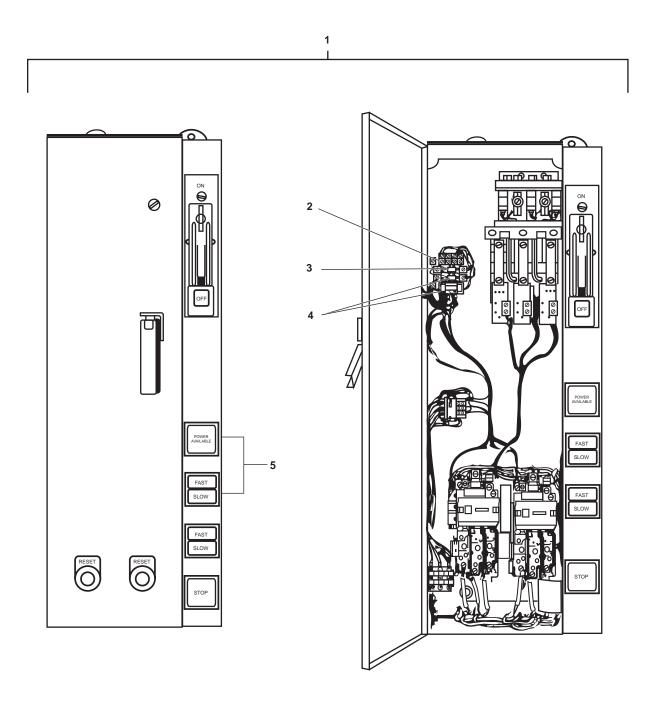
Engine Room Supply Fan 1 & 2 Motor Controller
